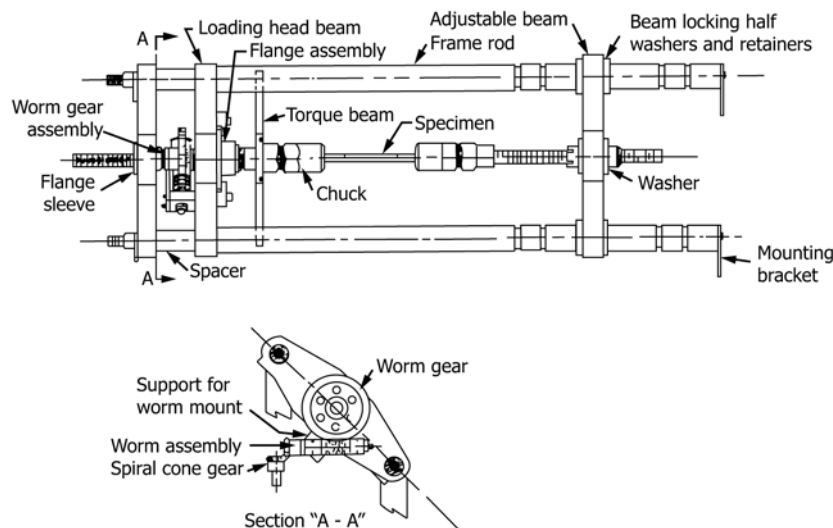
Testing Machine for Determining the Gage Factor using the Direct Tension or Compression Method
